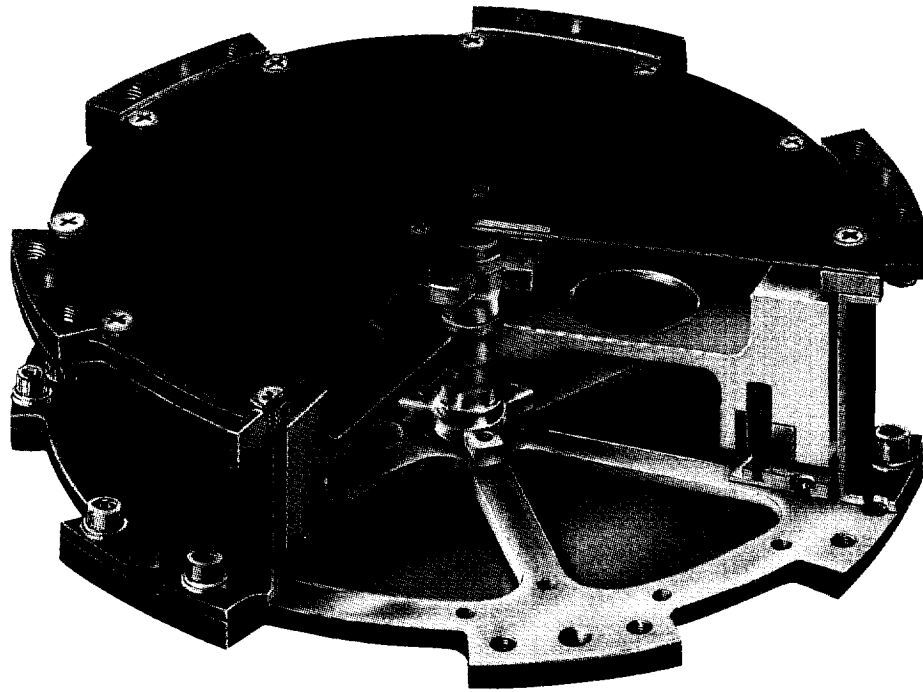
The modularity of the momentum wheel subassembly of the new design allows it to be used as an independent momentum wheel or reaction wheel.
